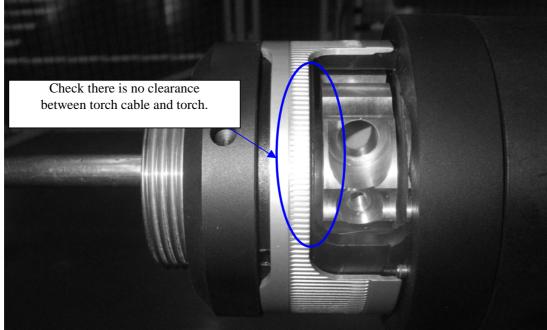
(f) Confirming of no clearance of torch cable
